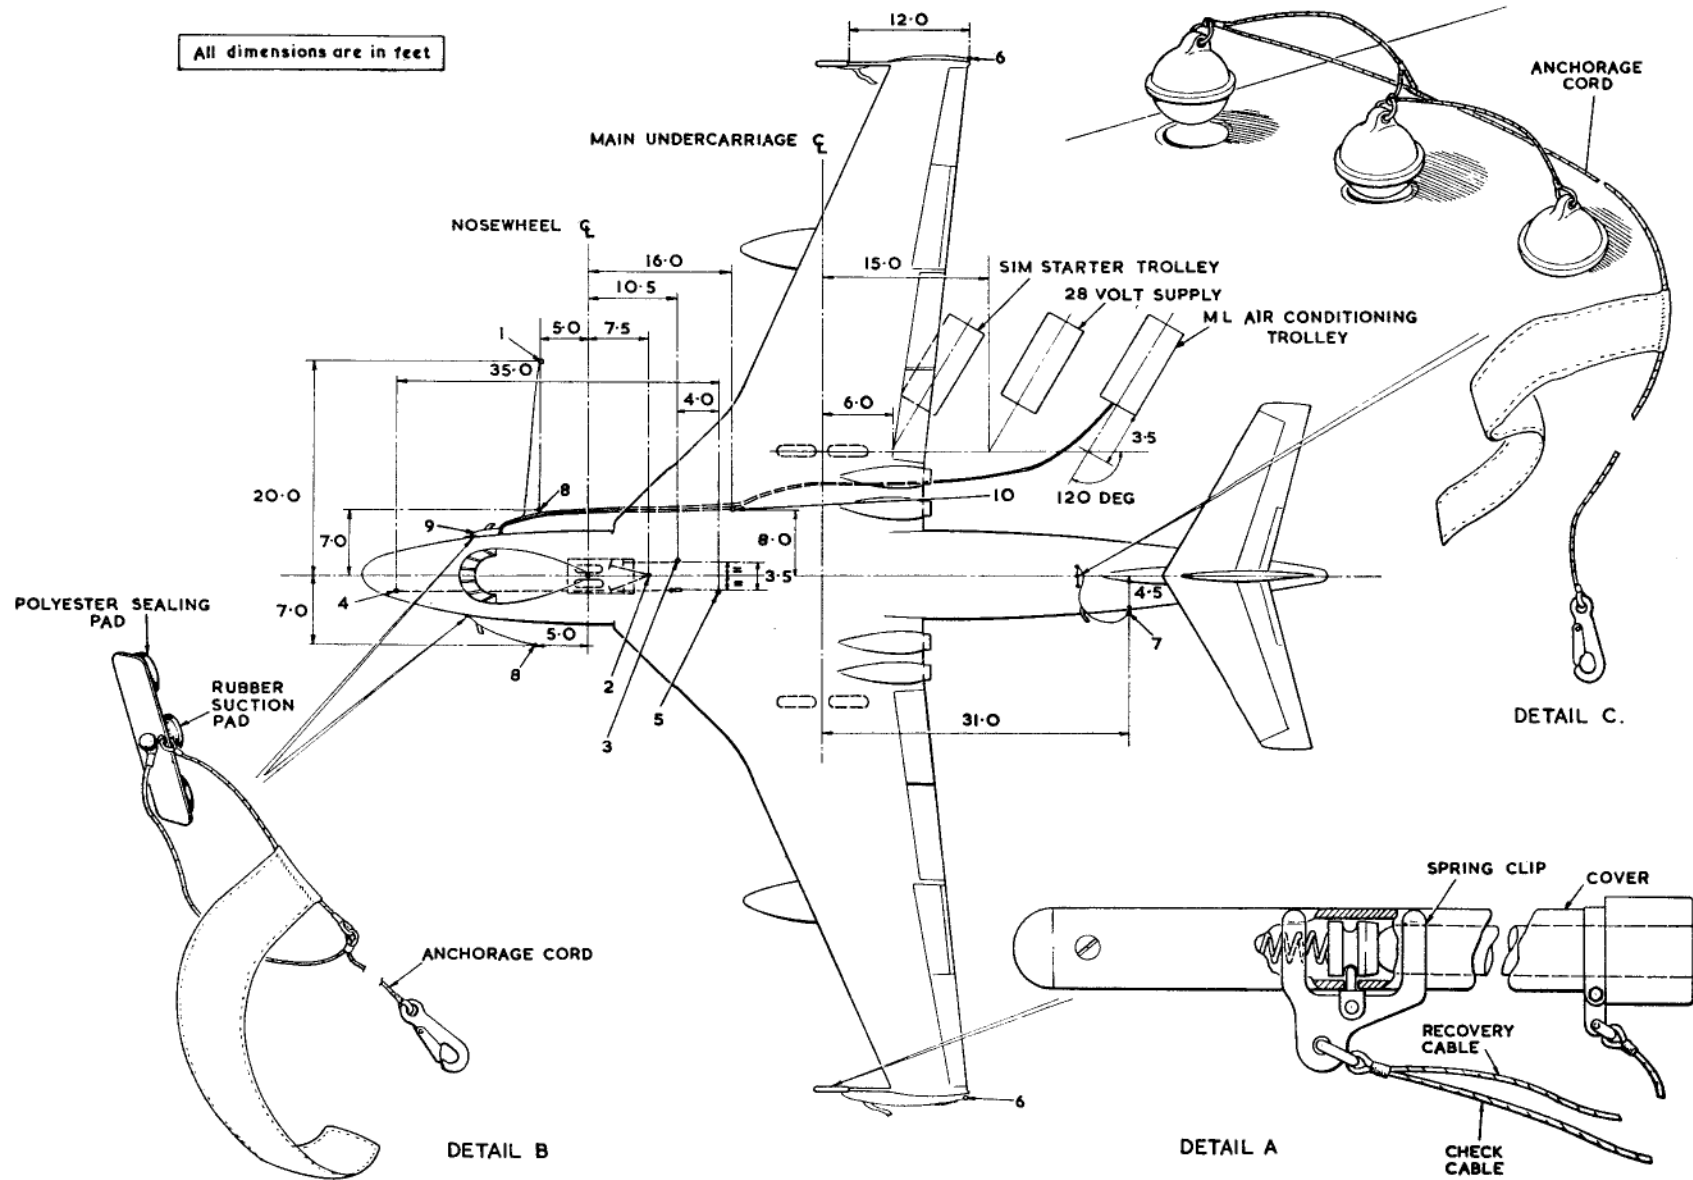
B. Anchorages, covers, connections and equipment (R.T.O.)
